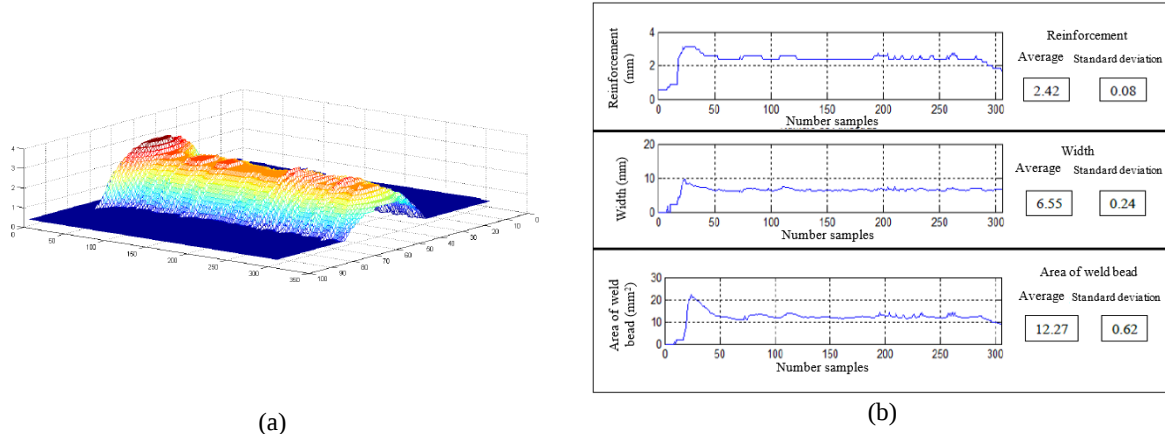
Acquisition of weld bead geometric parameters. a) Three-dimensional profile of the weld surface. b) Measurements of weld bead geometric parameters.
